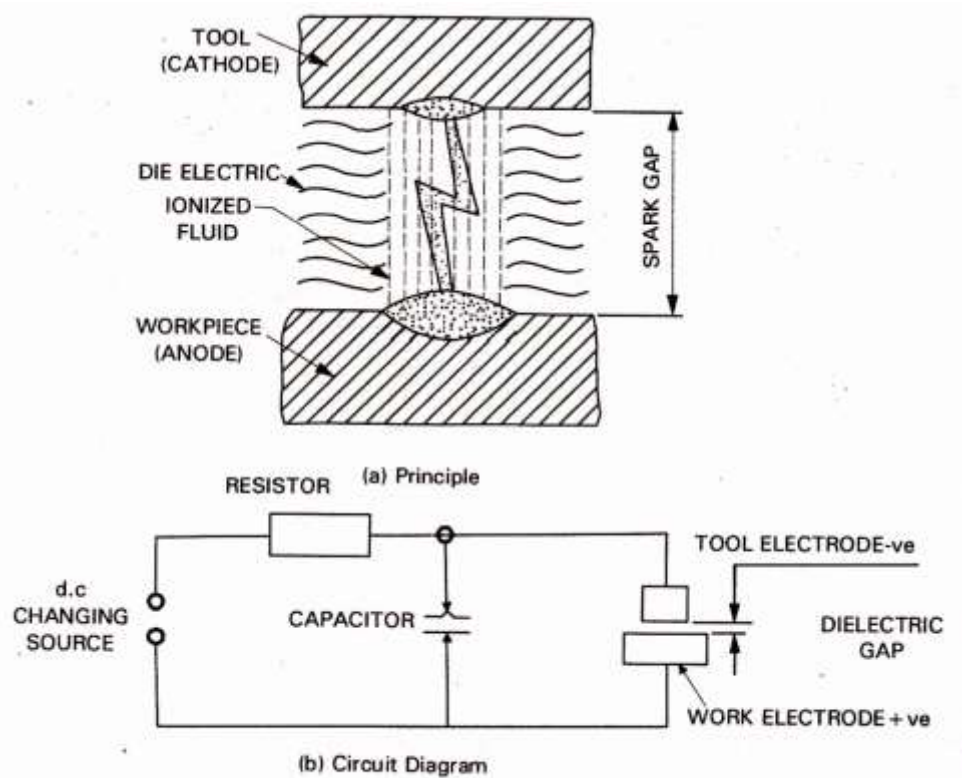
Principle of Electrical-Discharge Machining (EDM)
